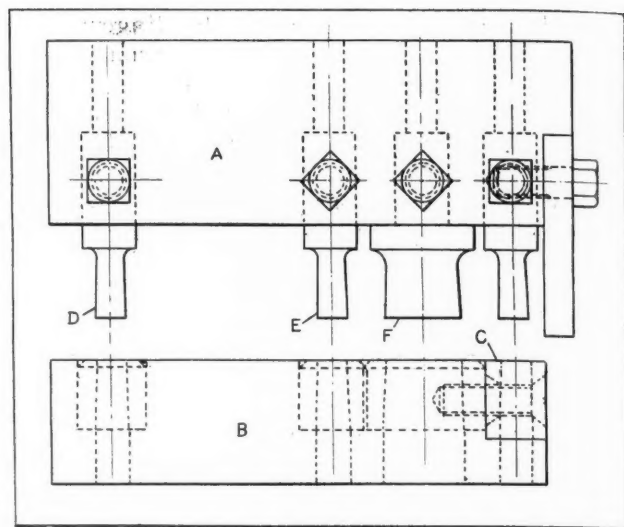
Piercing and Cutting-off Die for Part Shown in Fig. 1
